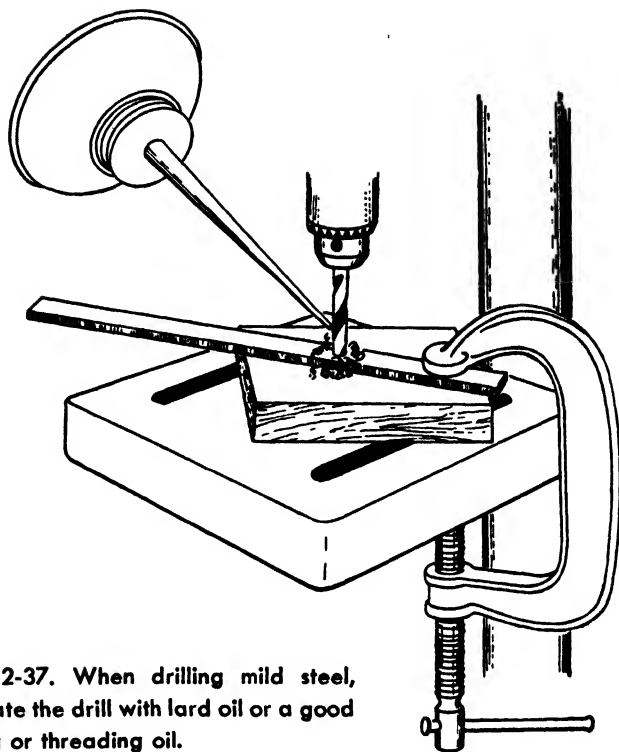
When drilling mild steel, lubricate the drill with lard oil or a good cutting or threading oil.
